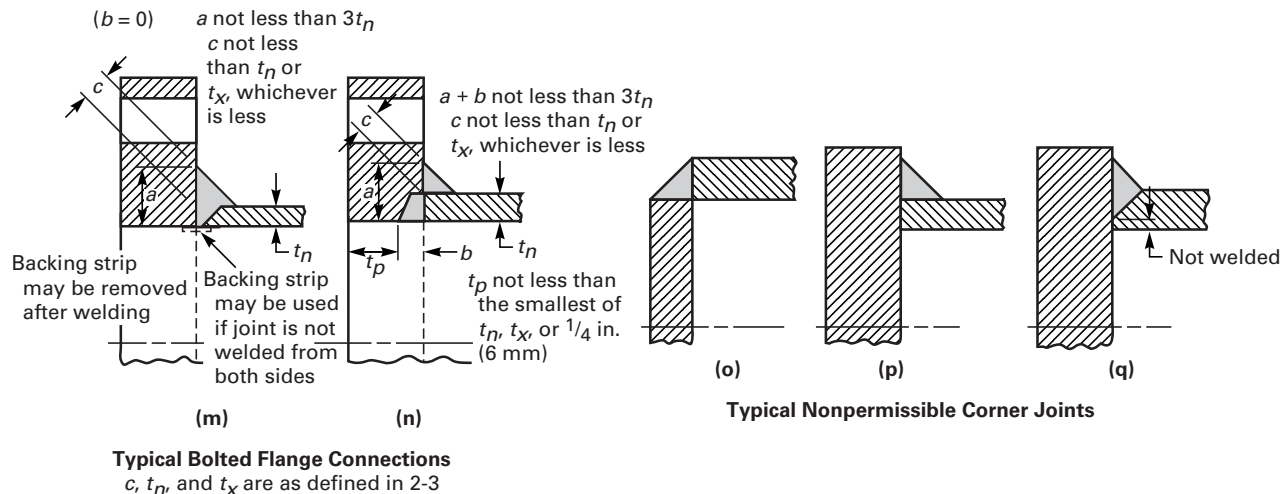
ATTACHMENT OF PRESSURE PARTS TO FLAT PLATES TO FORM A CORNER JOINT (CONT'D)
